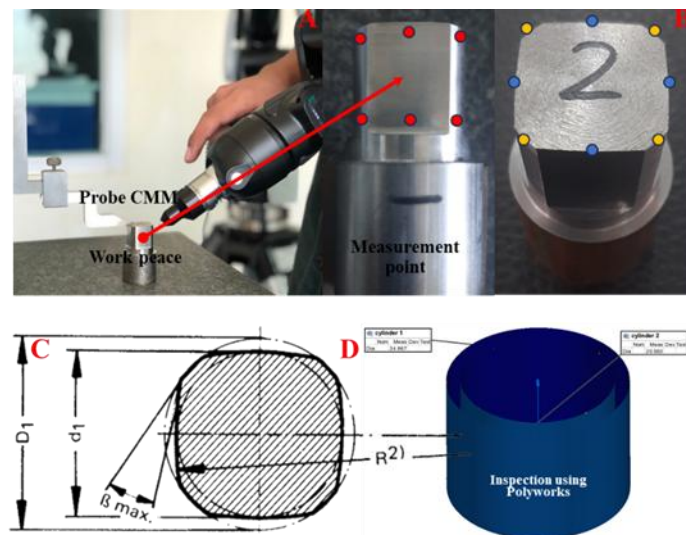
(a) Dimensional measurement method using CMM absolute arm using the probe, (b) Top view: dimension measurement points, (c) Basic dimensions of polygonal profile, (d) Dimensional inspection using PolyWorks Inspector software
